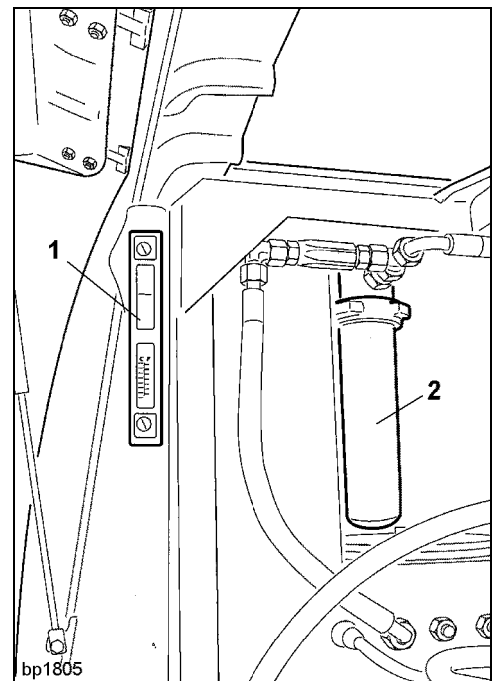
; Oil level indicator (1), hydraulic oil box, Fig.:
